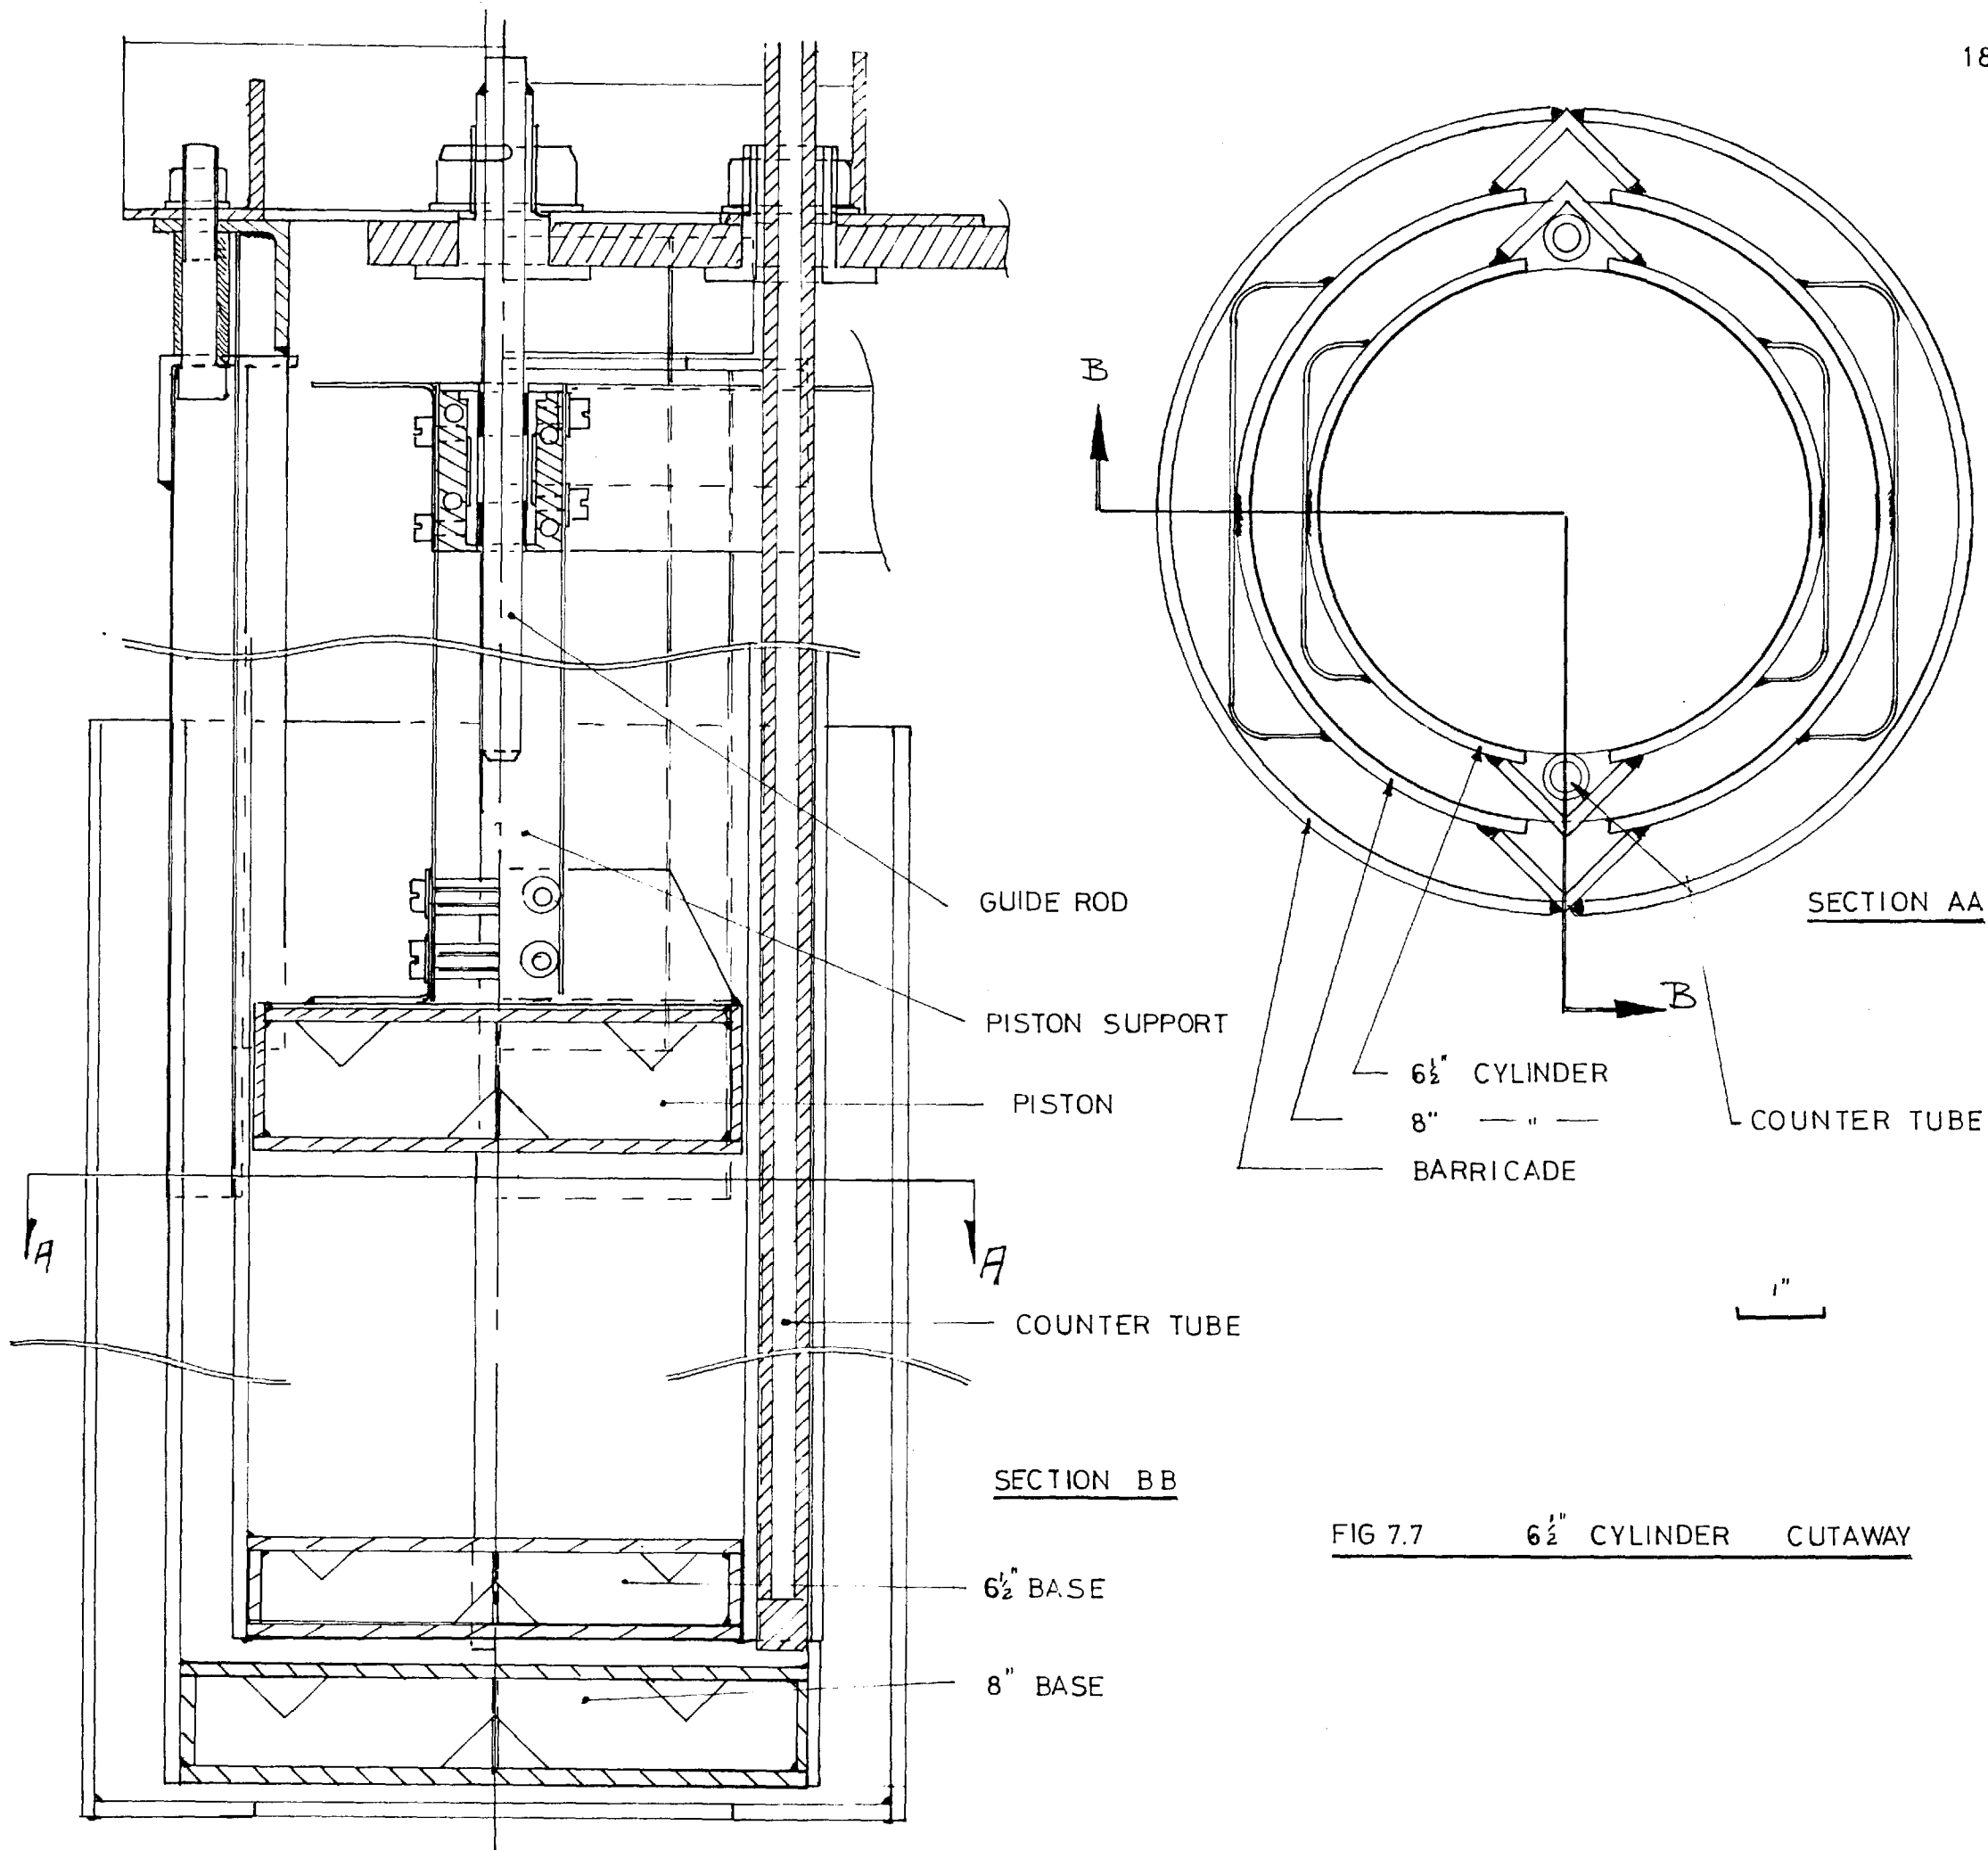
6 1/2" CYLINDER CUTAWAY
